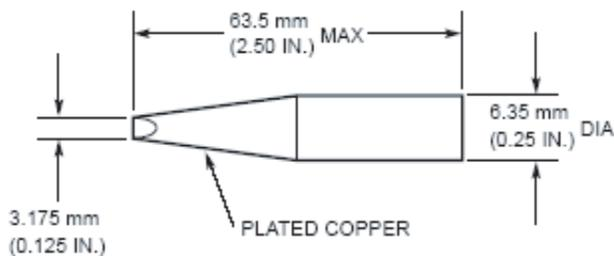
Example of soldering iron tip for hand soldering TH LED components
